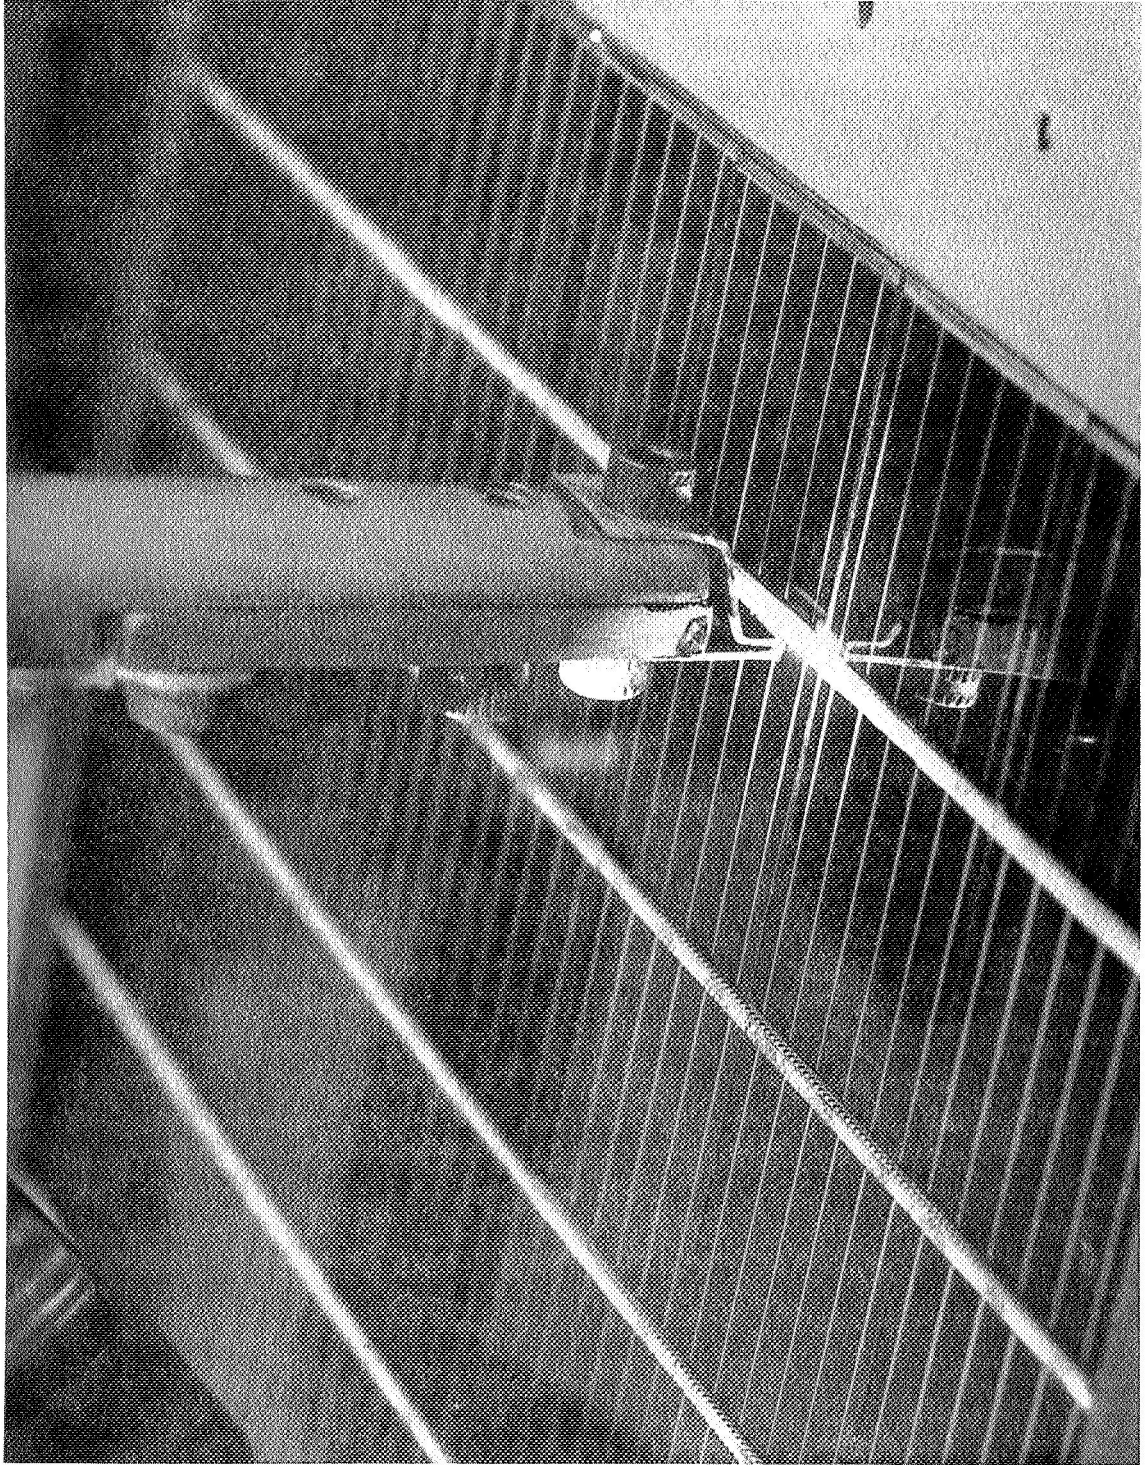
CELL-INTERCONNECTOR SOLDERING
